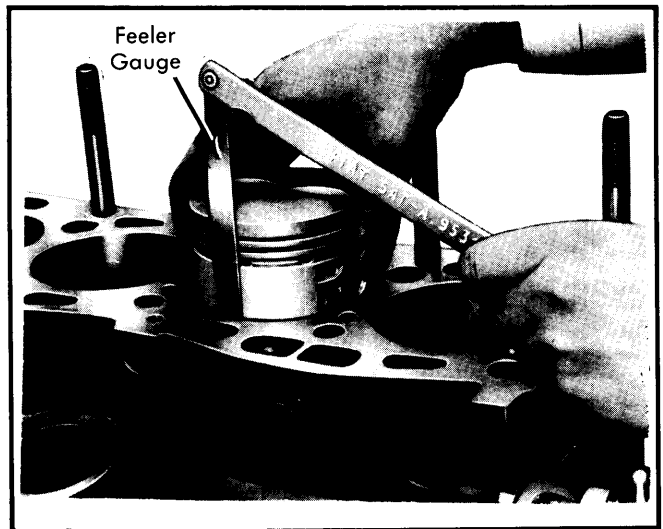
Using a Feeler Gauge to Check Piston-to-Cylinder Wall Clearance
